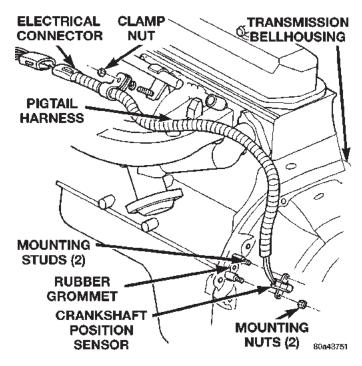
Crankshaft Position Sensor—2.5L Engine
